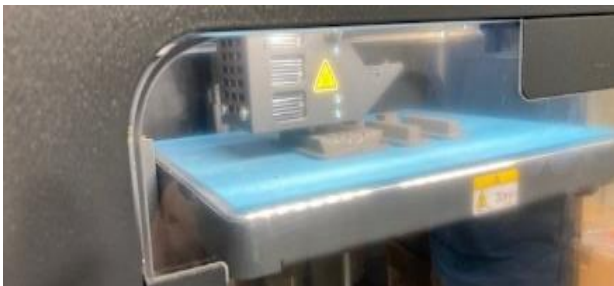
Part printed using the 3D Metal Printer. (Source: USCG)
